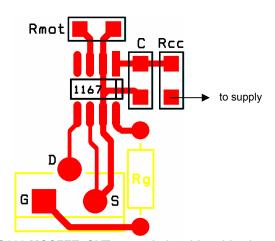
Single side board, TO220 MOSFET, OVT grounded, solder side view, through hole gate resistor.
